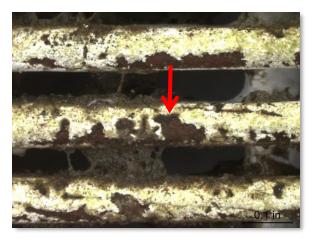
Detail view (10x) of coating damage on 2205 Duplex SS, before cleaning.
